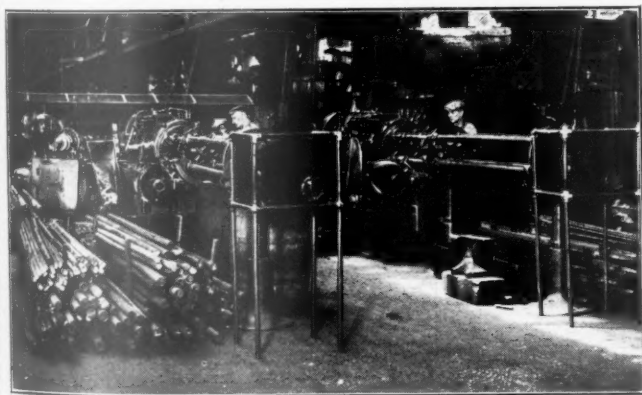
Gridley Automatics Used for Making Small Parts in Quantity from Bar Stock
